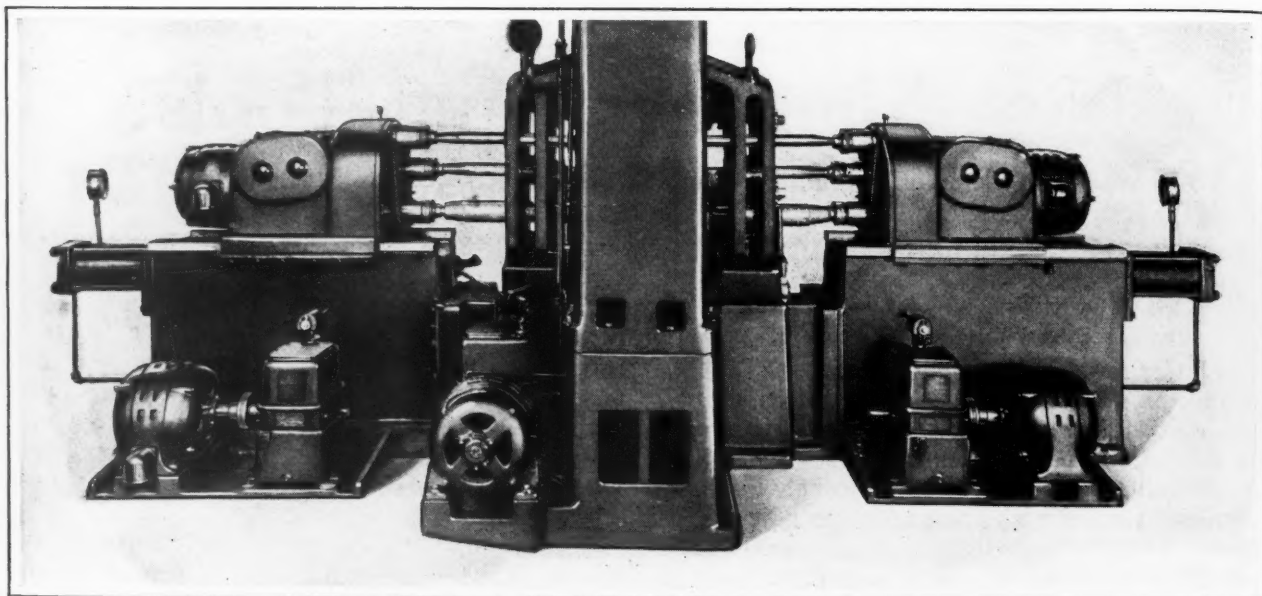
View of Rockford Boring Machine, Showing the Three Oilgear Pumps and Their Driving Motors
